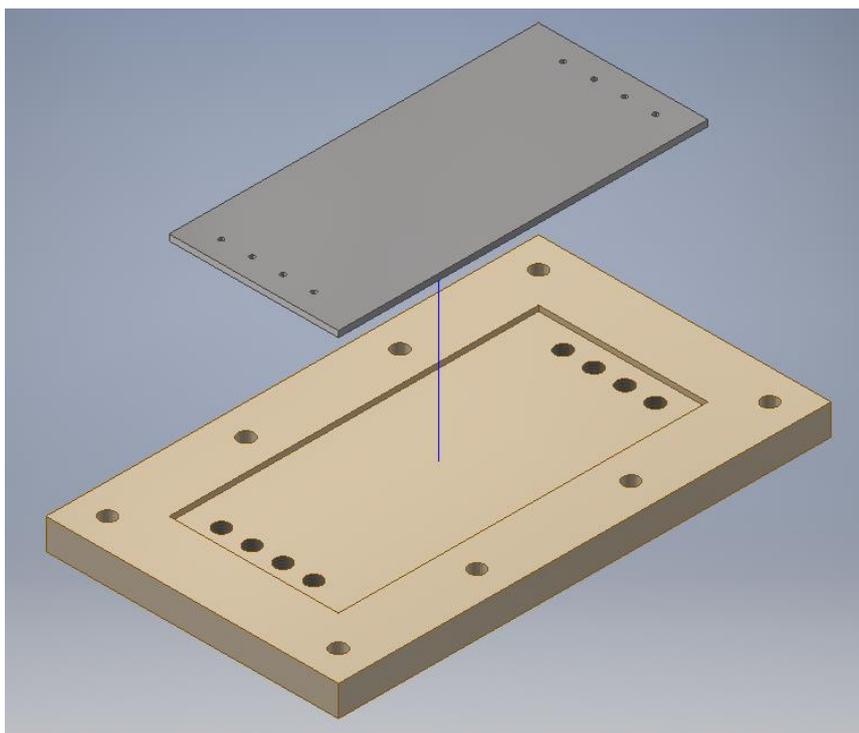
Design of the electrode with in- and outlet holes, and a POM piece to hold the electrode in place
